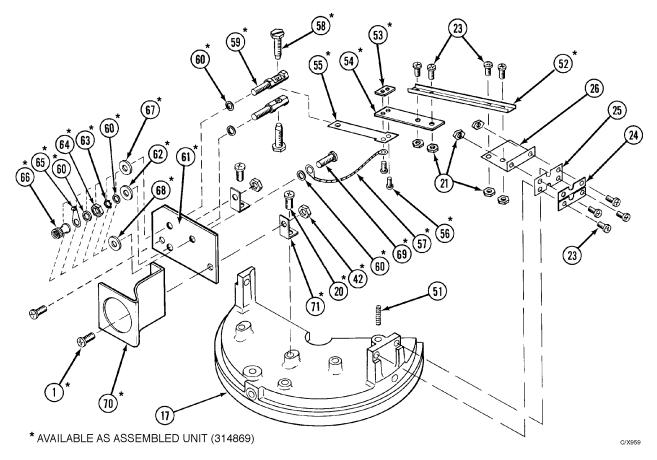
PP904A, PP904B, and P246A Exploded View.
